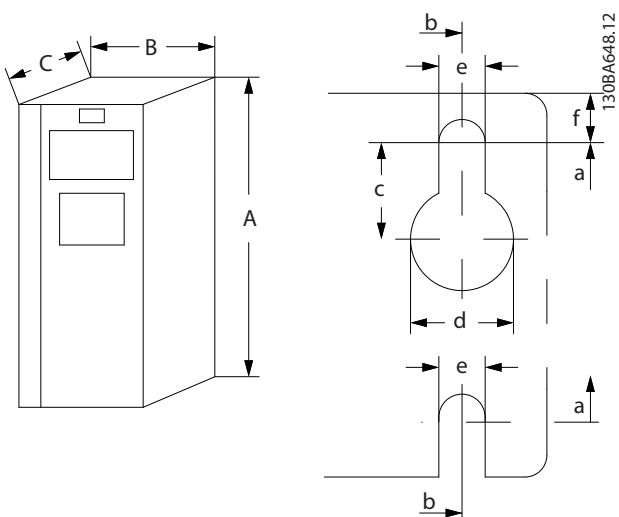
Top and Bottom Mounting Holes (See chapter 8.9 Power Ratings, Weight, and Dimensions)
